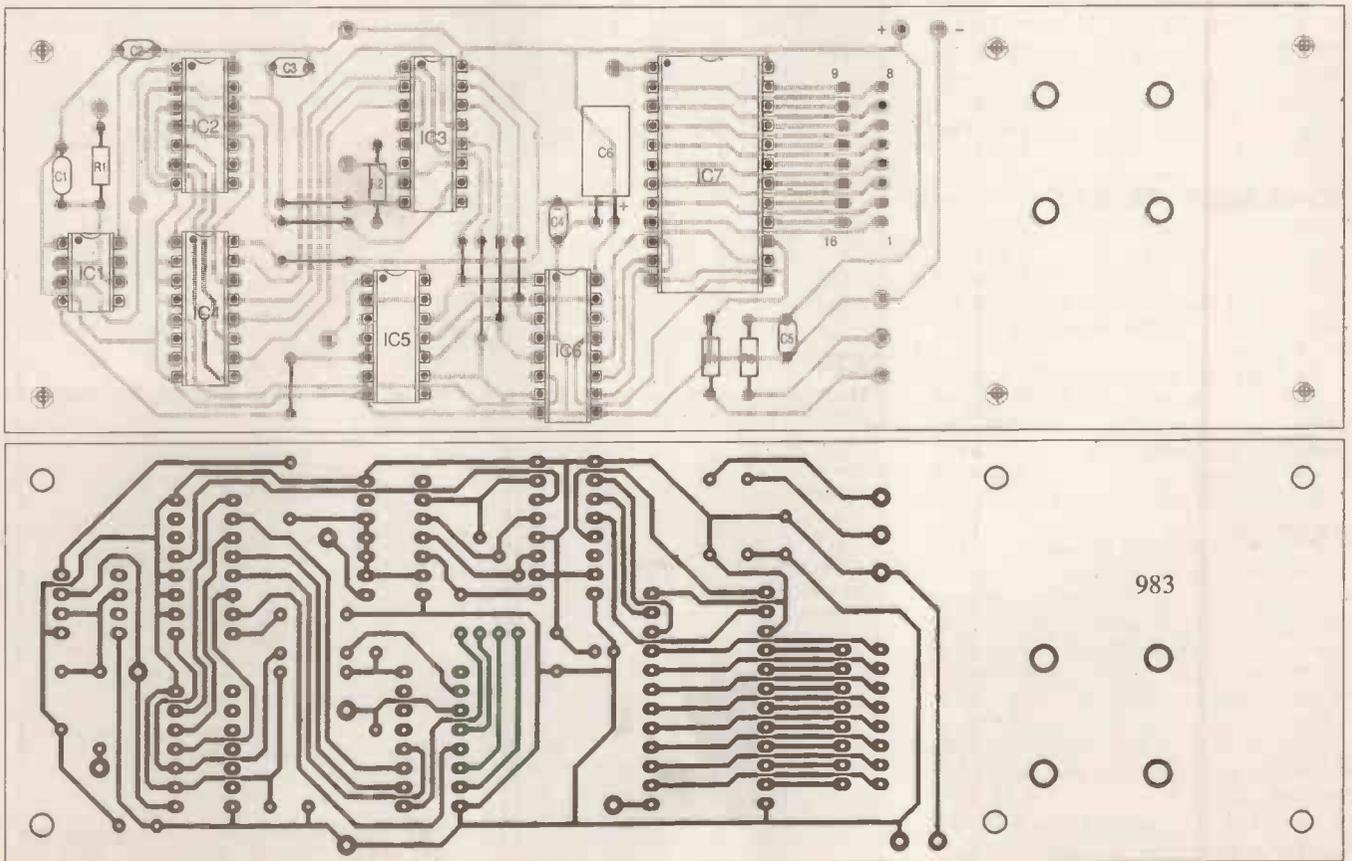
Programmer printed circuit board component layout and full size underside copper foil master pattern. The inner group of four holes on the right are for the ribbon cable ties – see photograph on opposite page.
